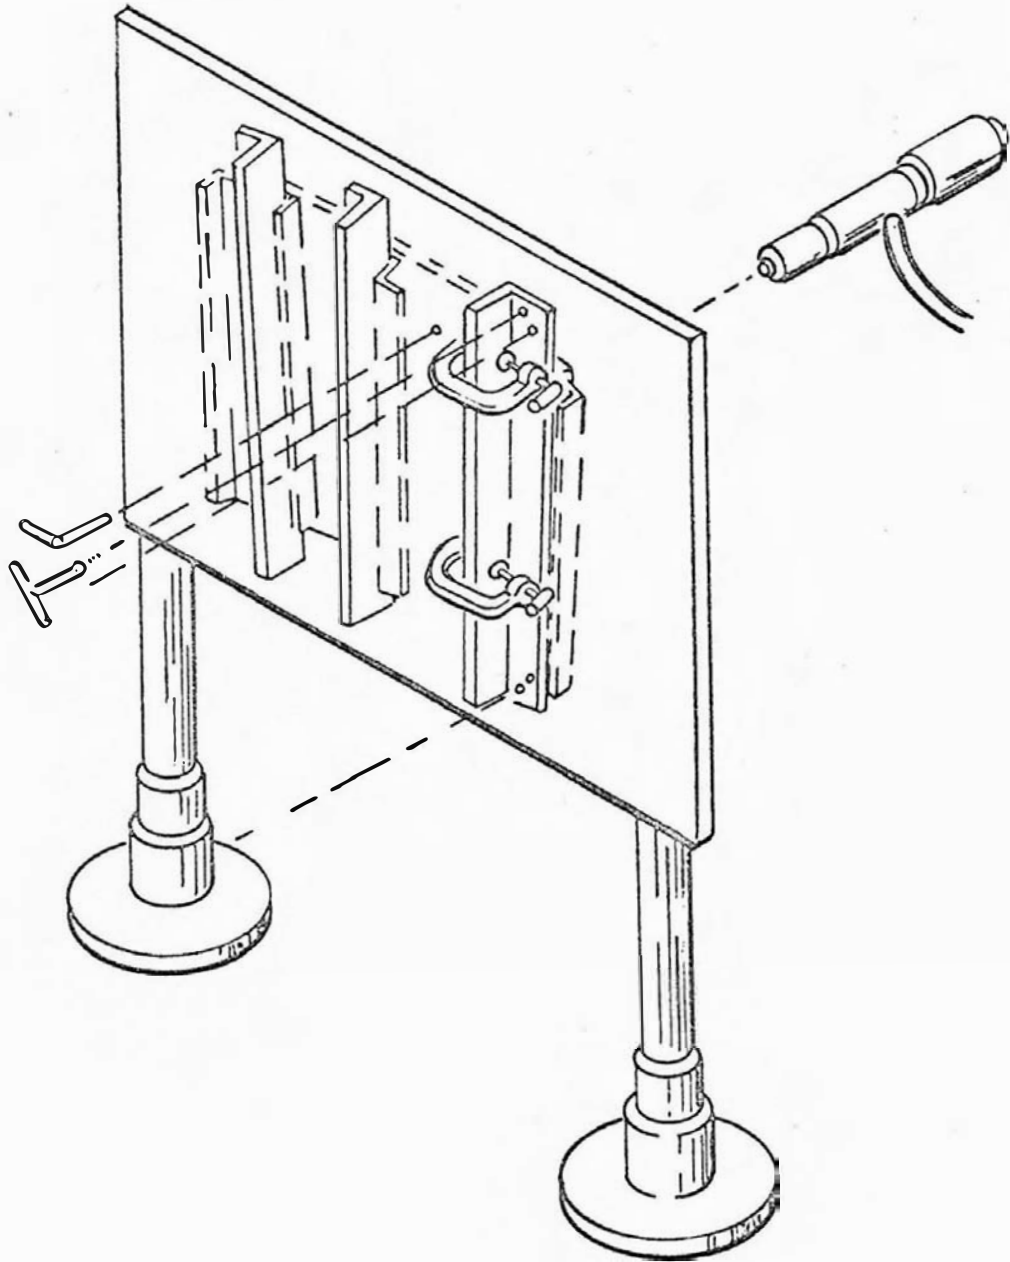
Upper Thrust Ring Access Panel Assemblies Assembly Fixture
